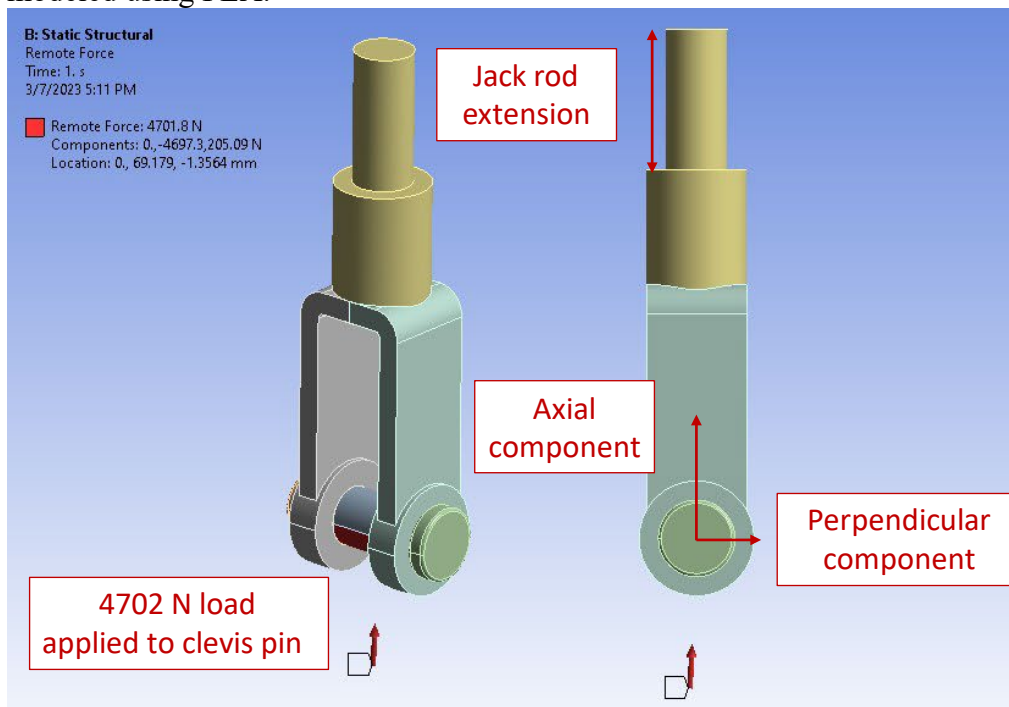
Load on the screw jack rod and clevis rod end; (left) geometry of the model, (right) applied force has axial and perpendicular components.
